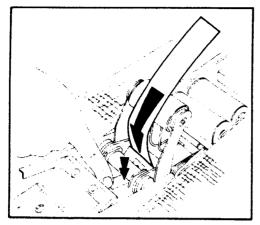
TAPE THREADING DIAGRAM - BOTTOM TAPING HEAD - LEFT SIDE VIEW
